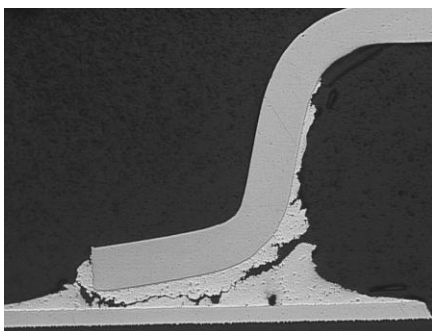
Cross section for 100% Solder joint open/ failure lead during TCoB
